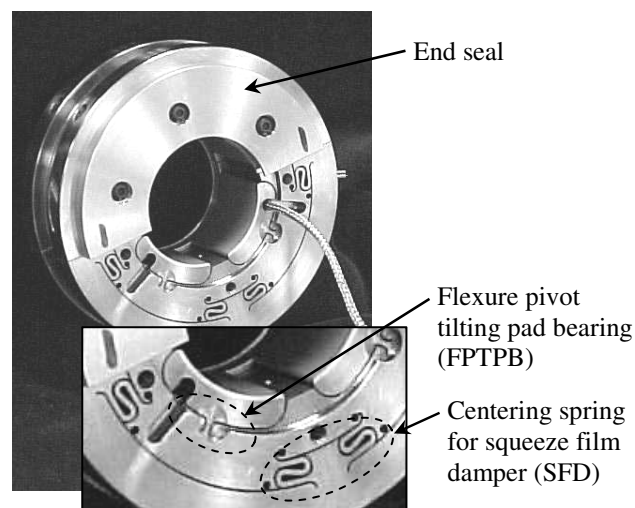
Integrated flexure pivot tilting pad bearing and squeeze film damper (image from [10]). Bearing shown uses oil lubricant and requires end seals; inset image is magnification of flexure pivot pads and centering spring structure created by wire-EDM.
